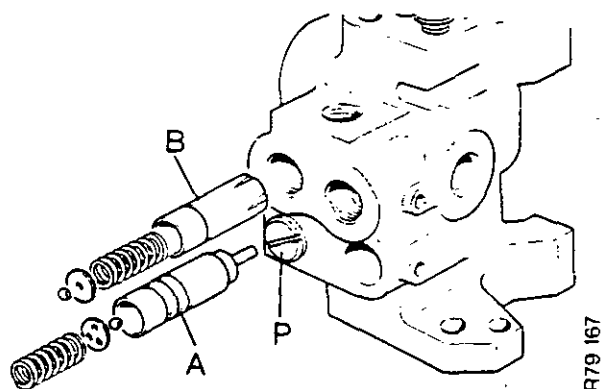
REMOVING THE BY-PASS AND HOLD VALVES
